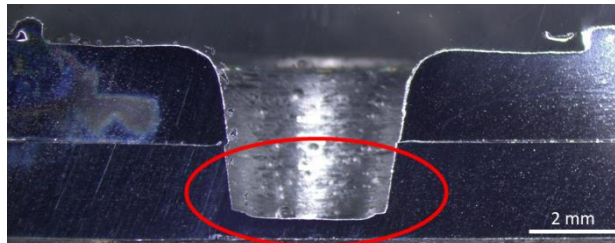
Macrosections of complete back-filled specimens with pilot holes at both plates
